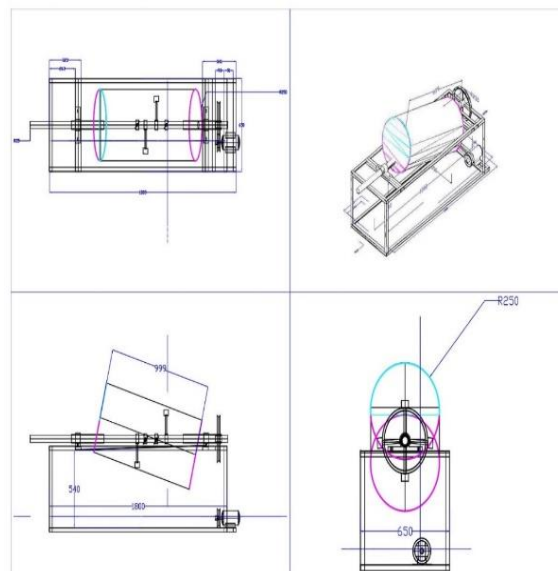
Orthographic View of the Tumble Barrel Mixer (All dimensions in mm)
